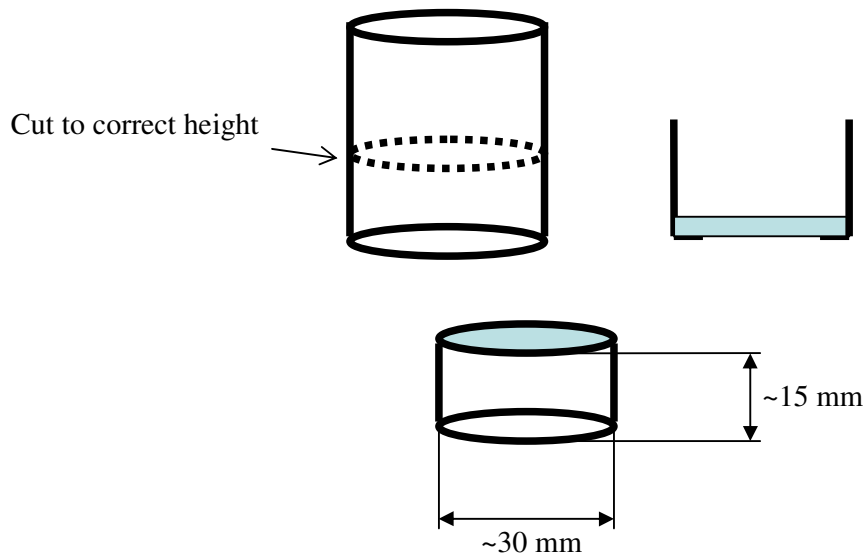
A schematic of the modified mould and the test piece that it produced.
